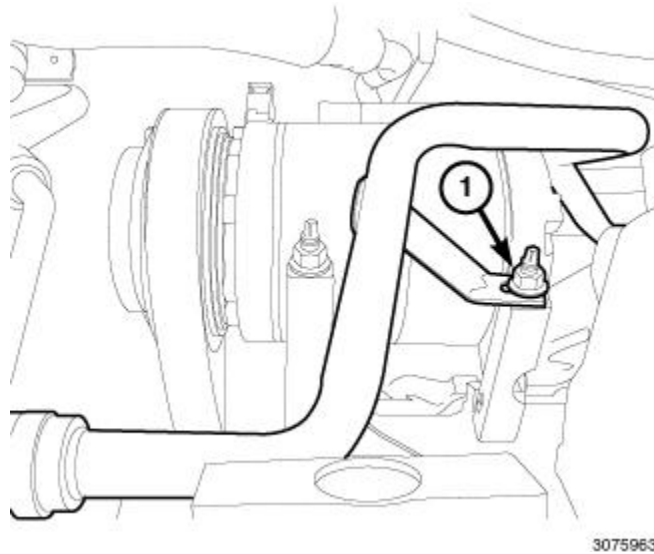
Heater Core Return Tube Lower Support Bracket Retaining Nut
